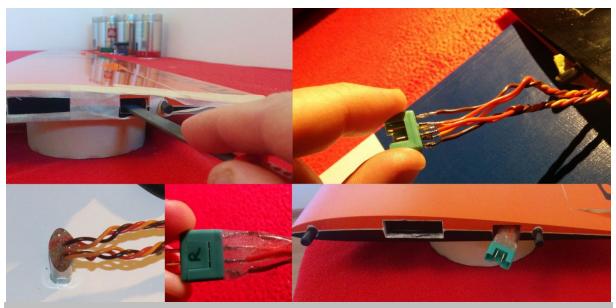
Mount the wing sided multiplex plugs: A little tuning of the servo cable outlets is needed to ensure that the plugs can move freely in there (upper left). Solder the cables of both wing servos onto the male plug (upper right). Next, wrap some transparent tape around the plug and cables and fill the resultant cavity with 5min epoxy (lower left). After the epoxy has hardened you have got a perfetly isolated and protected connetion (lower middle), and can be freely moved around in the cable outlet (lower right).
